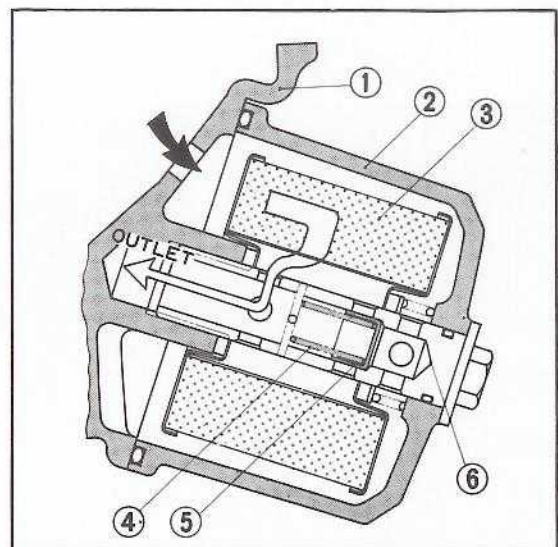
① Crankcase ④ By-pass valve spring
